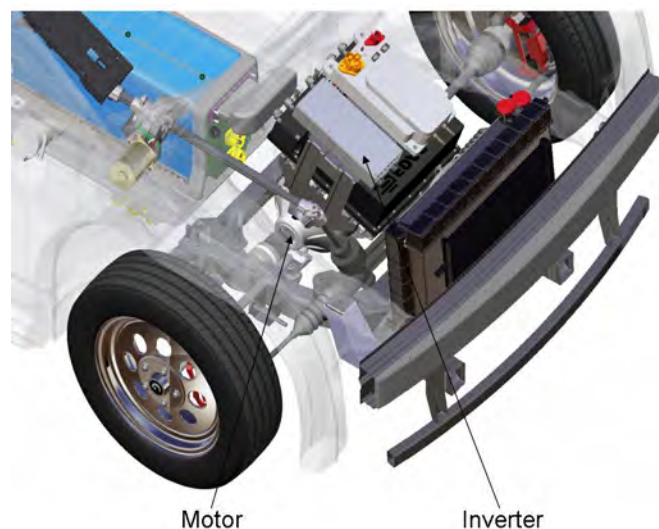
FSV-1 PHEV₂₀ front wheel drive motor and inverter
